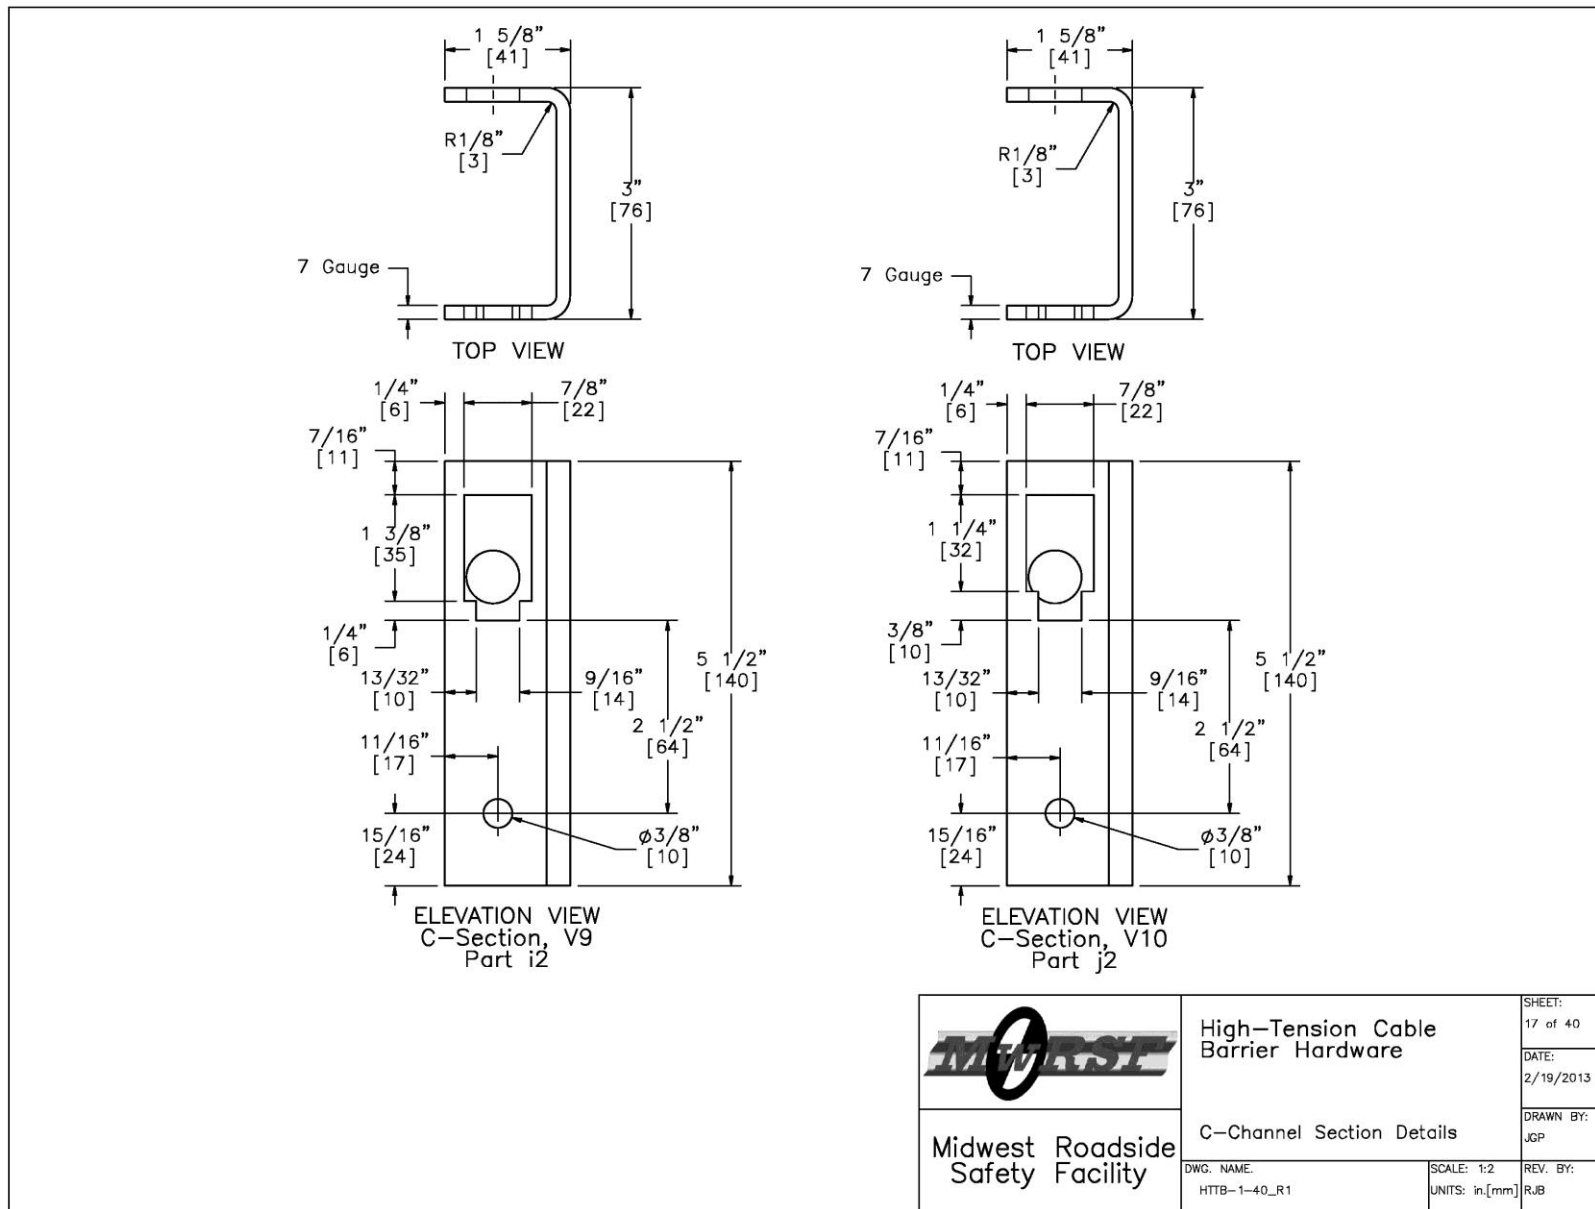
C-Section Details, Test Nos. HTTB-1 through HTTB-40
